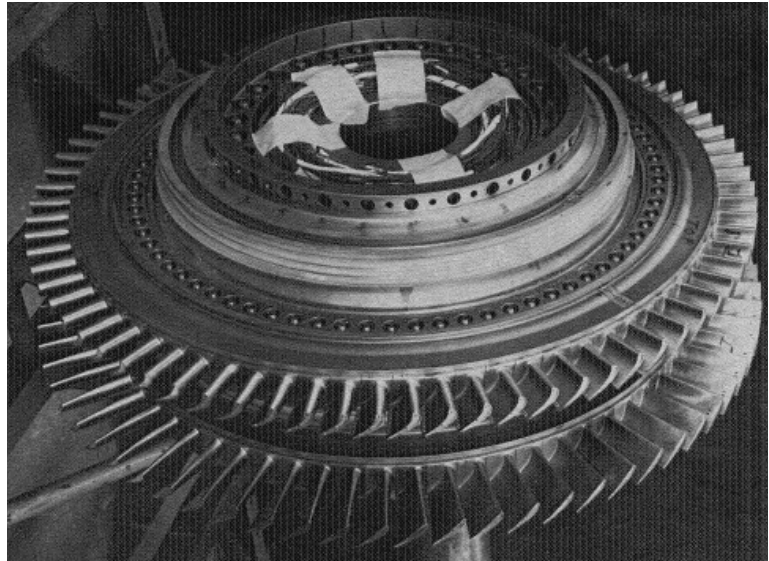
Photograph two-stage rotor assembly for E³, with Stage 1 Blades shown on top [26].
